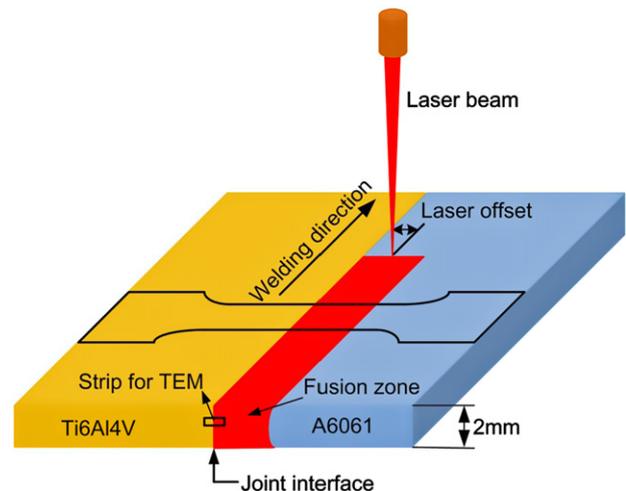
Schematic drawing of laser welding of Ti6Al4V and A6061 without filler wire and the sampling location.
